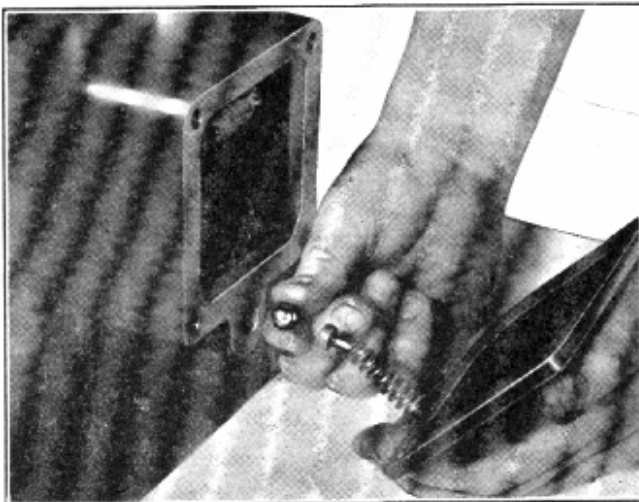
Gear Shift Cover, Spring, Plunger and Ball are Removed and Installed in Order Shown
